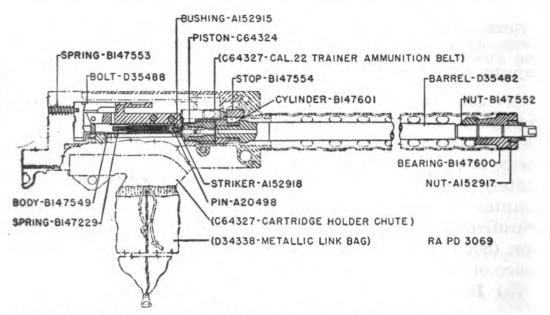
Caliber .22 machine-gun trainer M4—sectionalized view.
